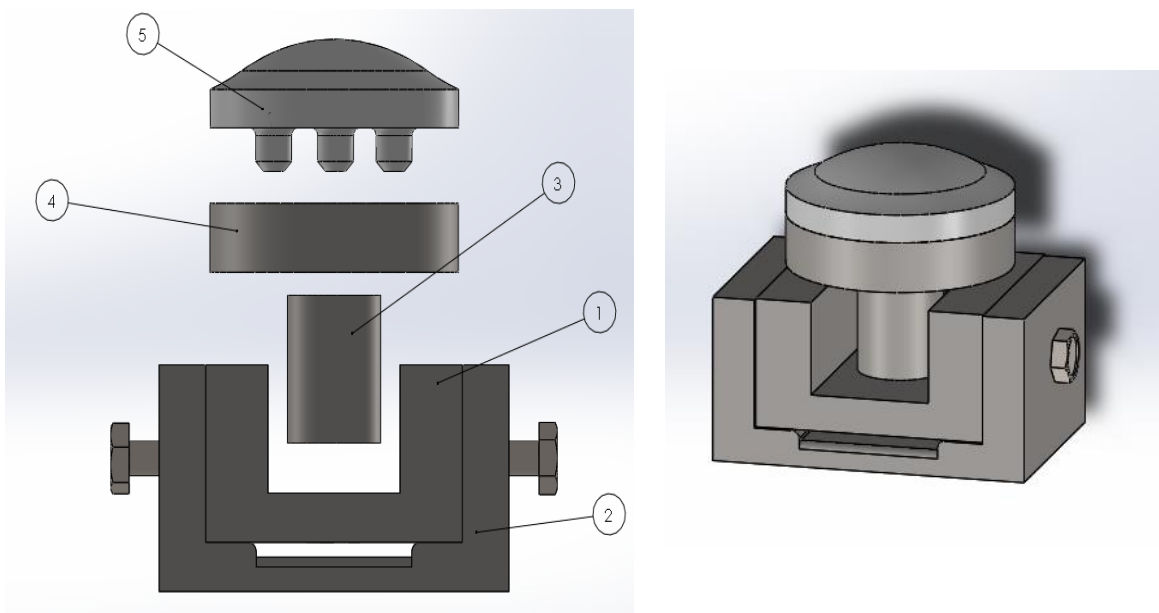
CAD design of the instrumented patella with the polyethylene patellarinsert (assembly).
